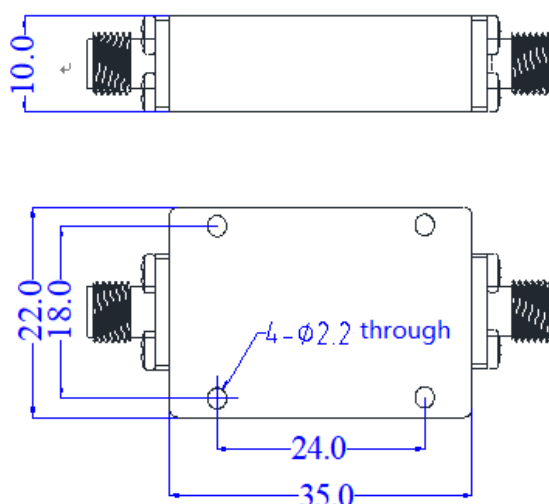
JX-HPF1-6G24G-60SF front panel layout
